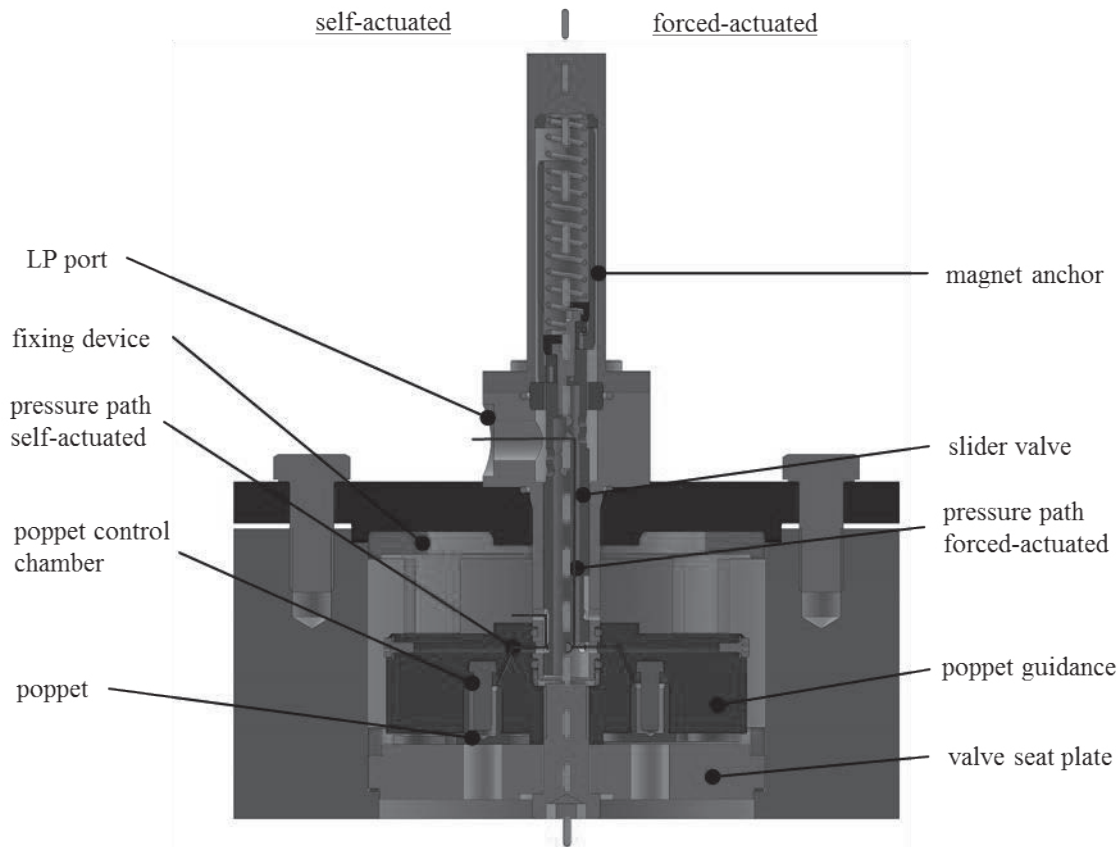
CAD-model of the combined valve for high pressure side (springs hidden for better clarity)
